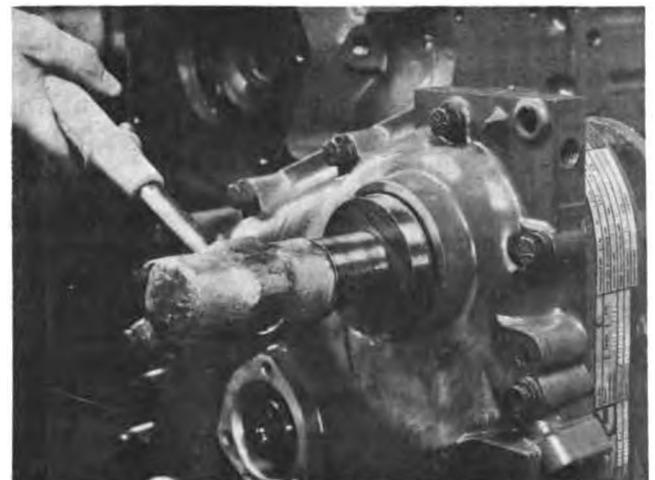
(N114267). Install The Oil Seal For The Accessory Drive.
